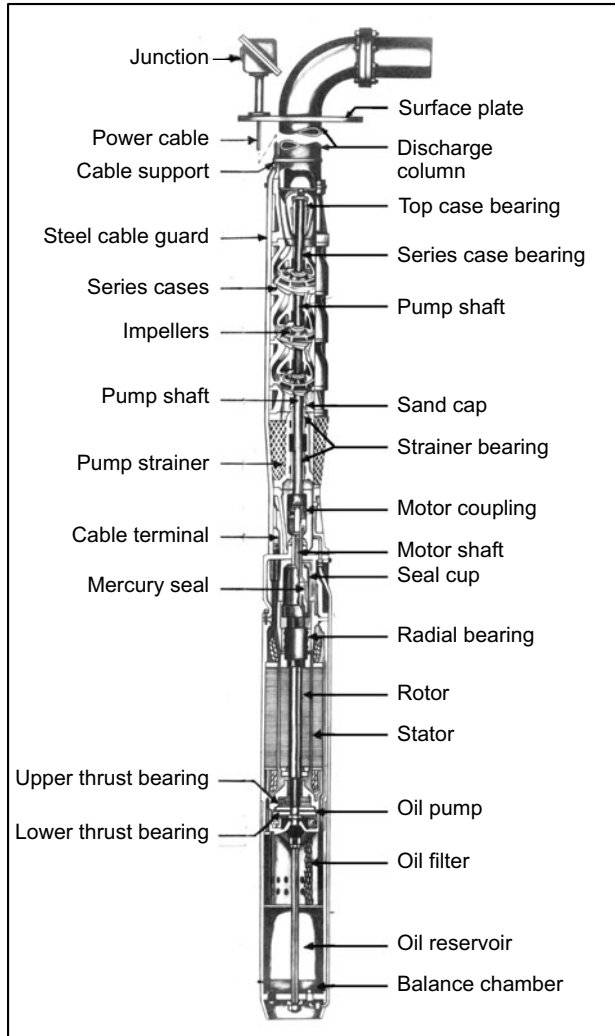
Sectional view (schematic) of a submersible pump showing parts
